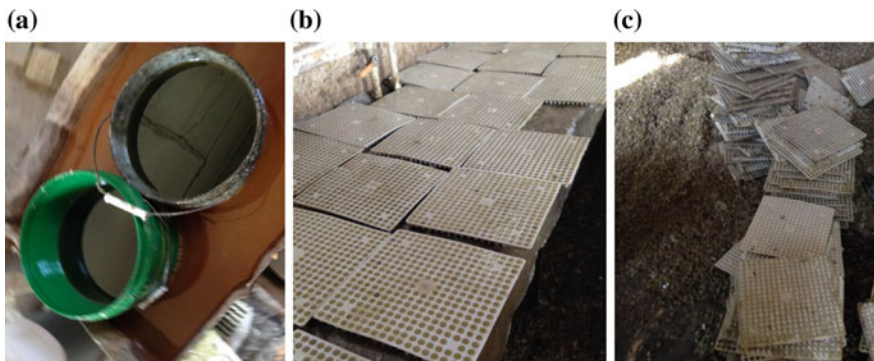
Photograph of casting process for resin abrasive blocks. a Raw materials; b curing molding; c demolding
